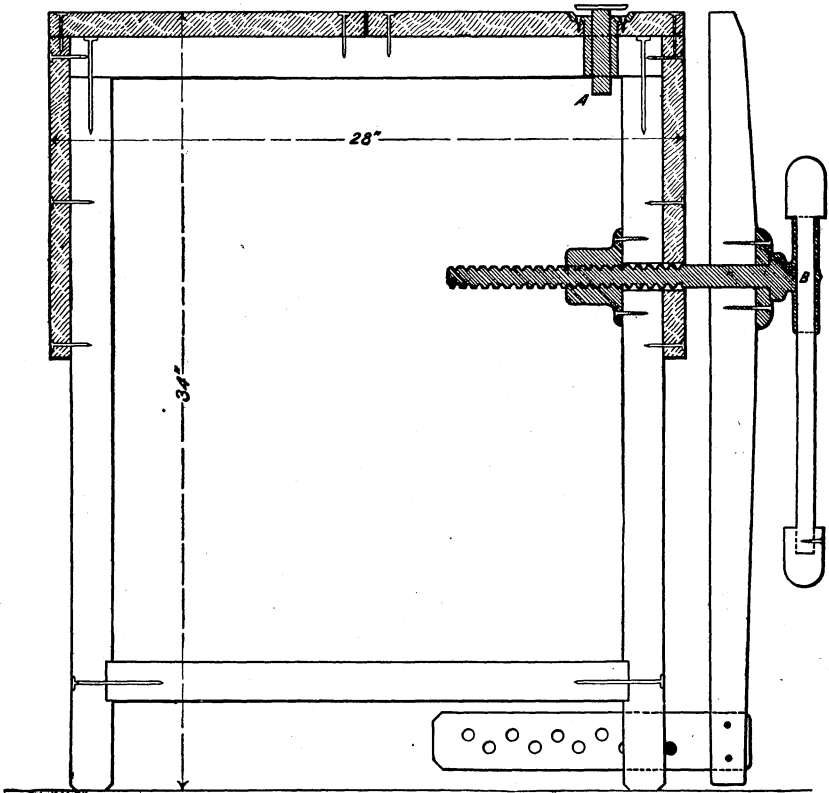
Cross section of workbench: A, planing stop; B, bench screw.
